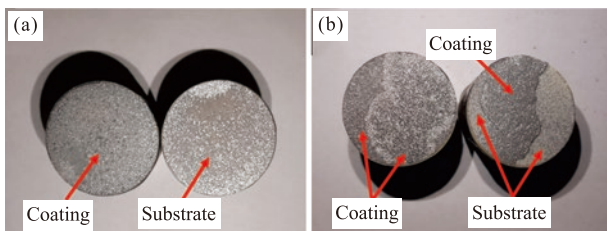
Macroscopic morphology of fracture surface: (a) 300 °C; (b) 600 °C
